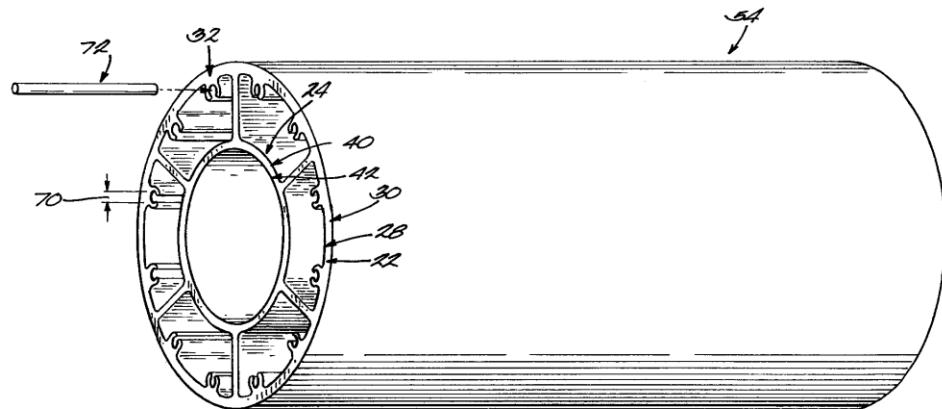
An Embodiment of Invention from the ‘059 patent: Idler (54), Balancing Pins (72) & Balancing Lug (32)
